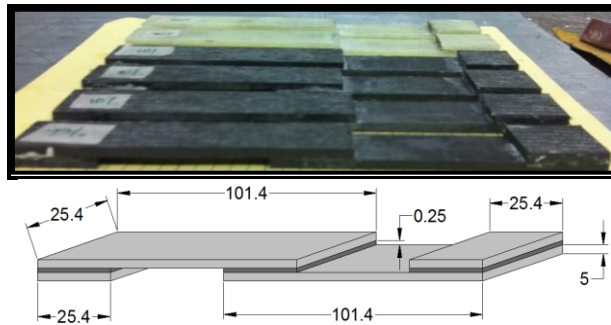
Typical single-lap joint specimens (dimensions in mm).
